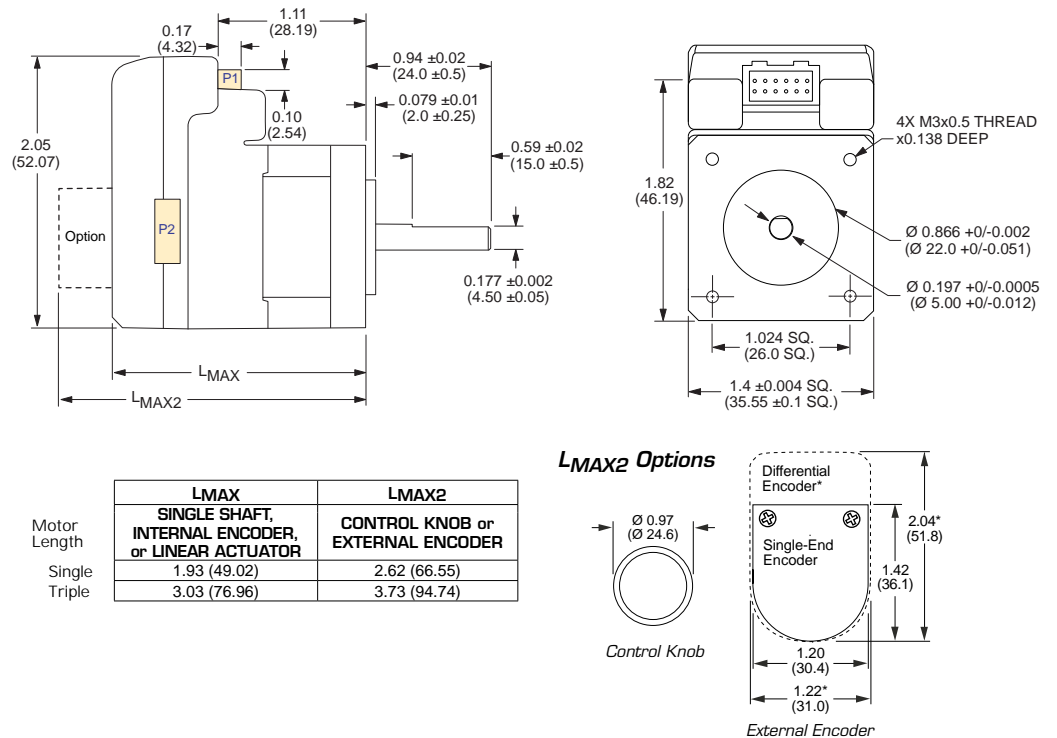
External shaft mechanical specifications - dimensions in inches (mm)
